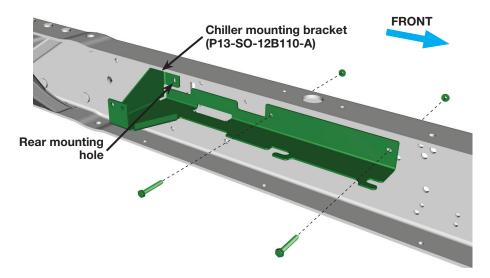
Marking Chiller Mounting Bracket Rear Hole
